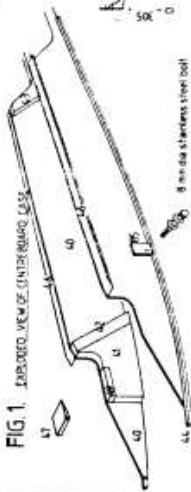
EXPLODED VIEW OF CENTERBOARD CASE
